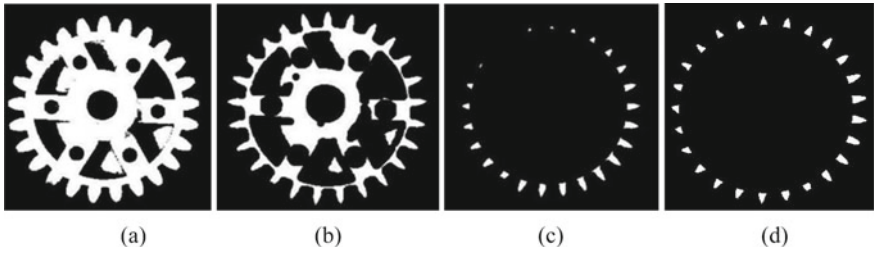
a De-noised image, b binary gear image, c defective gear, d image after multiplying mask to gear image (non-defective gear)
